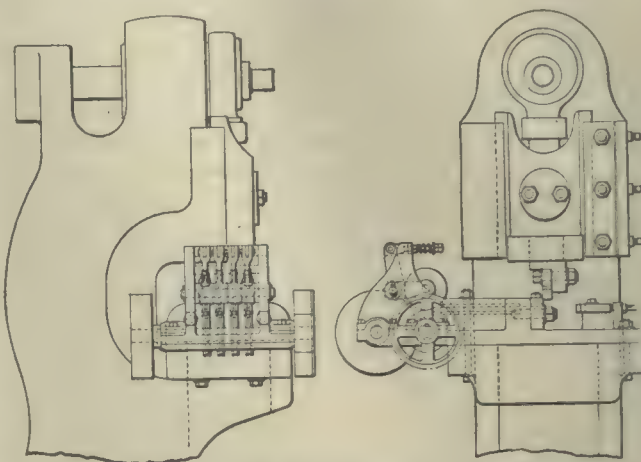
FIXTURE FOR CUTTING BAR STOCK
